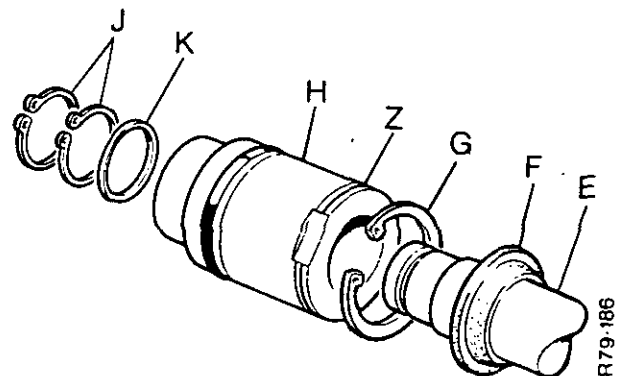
ASSEMBLY OF THE SUPPORT RAM
